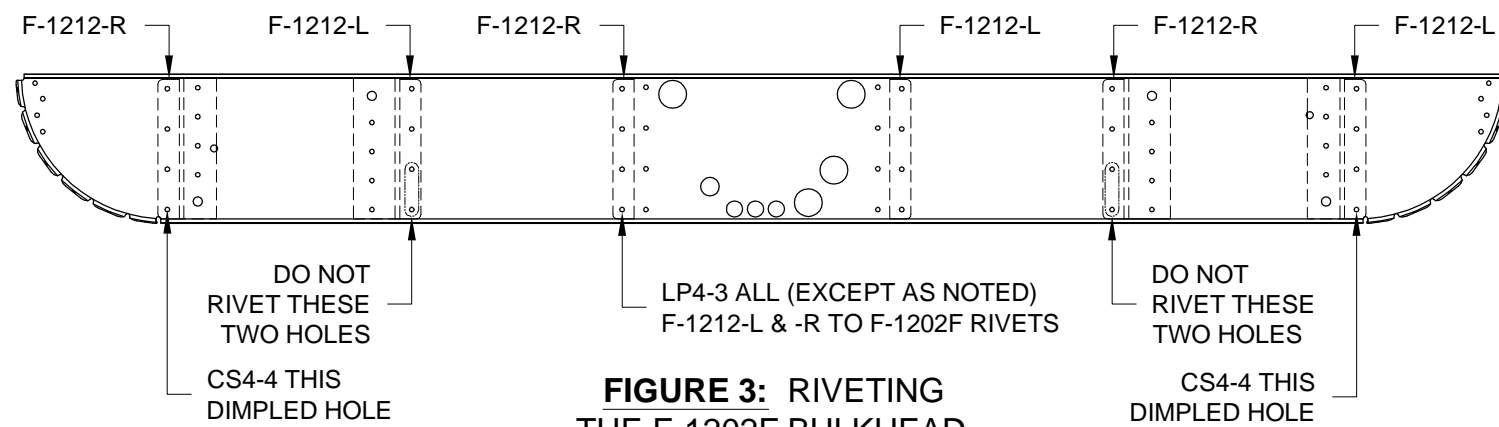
RIVETING THE F-1202F BULKHEAD
